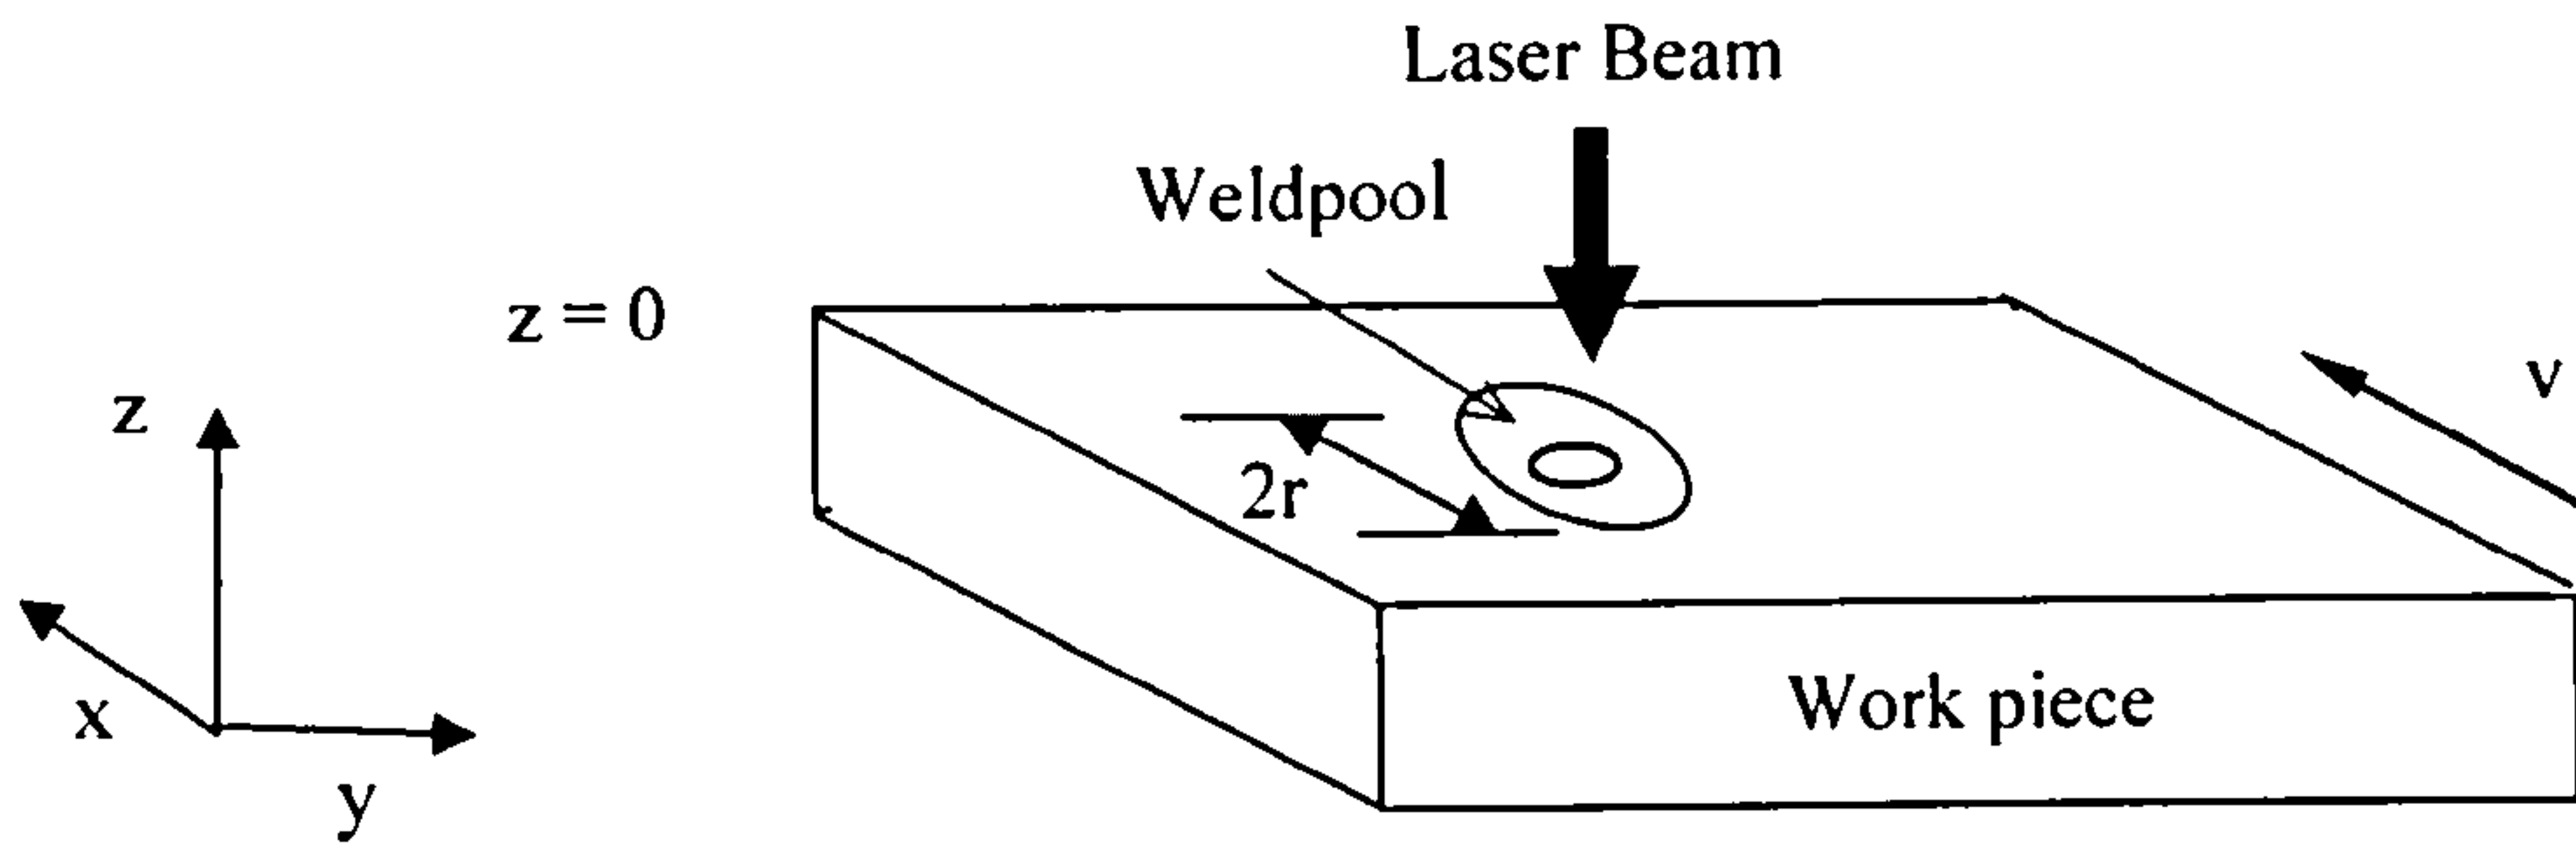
Laser conduction welding coordinate system and geometry
